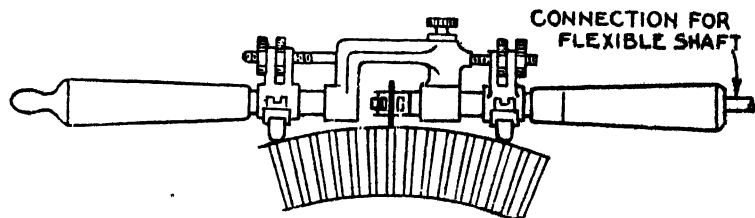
Motor driven mica cutting tool in which the cutting tool is mounted on a slide and moved back and forth by hand. The drive is through a flexible shaft as shown, or a belt may be used.
